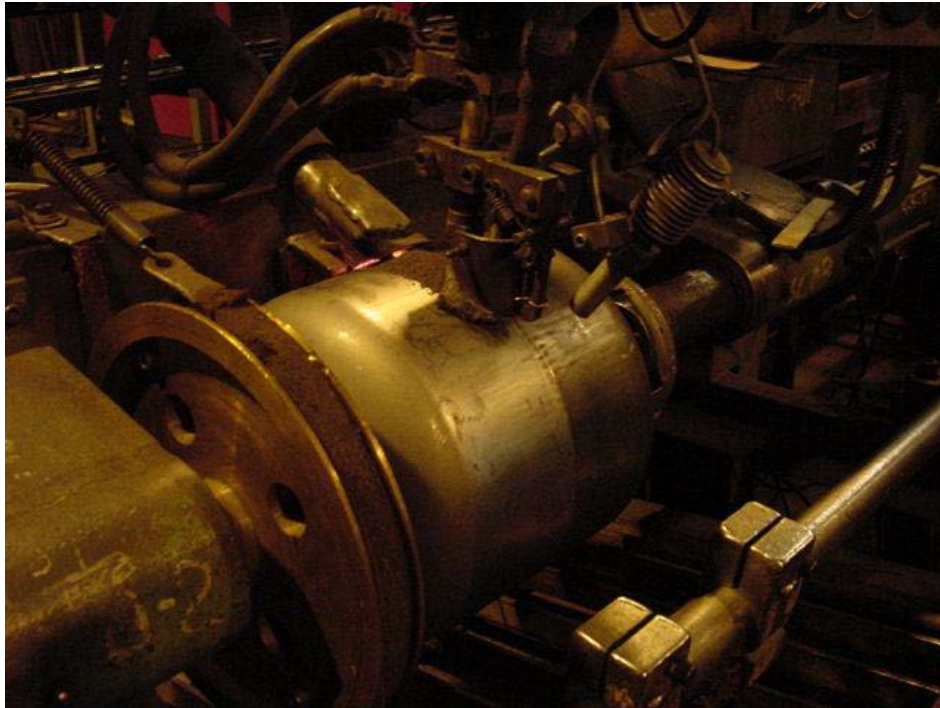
Circumferential welding process - submerged arc welding (Gomes, 2013)
